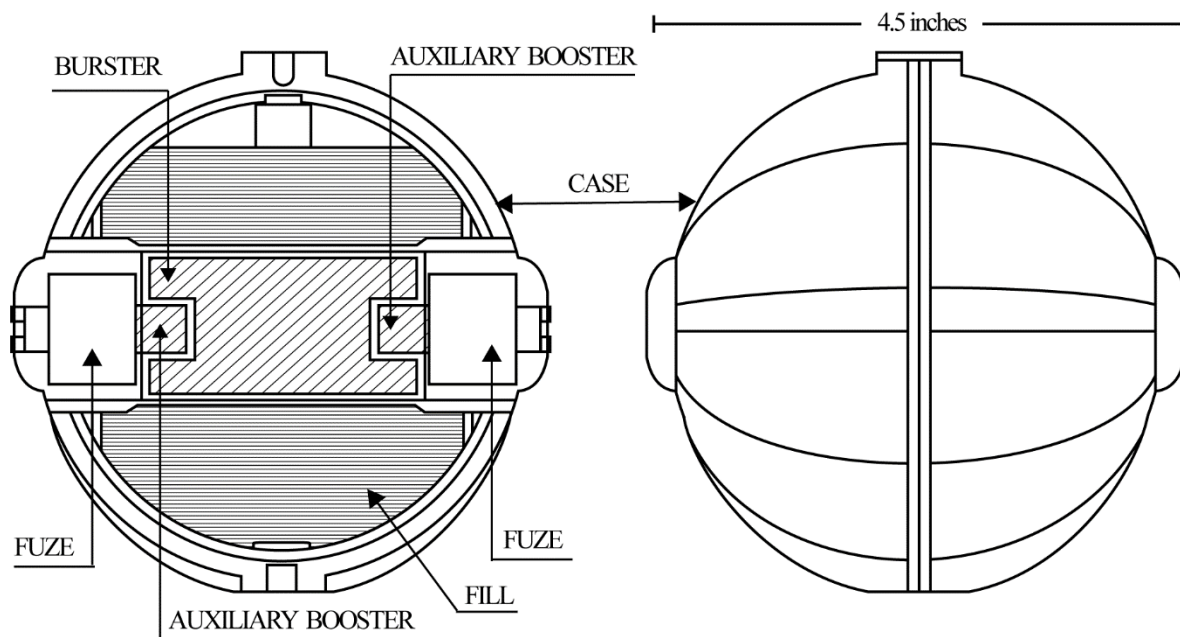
Bomblet, 3.4-pound, Spherical, M134 (E130R1) - Line Drawing
